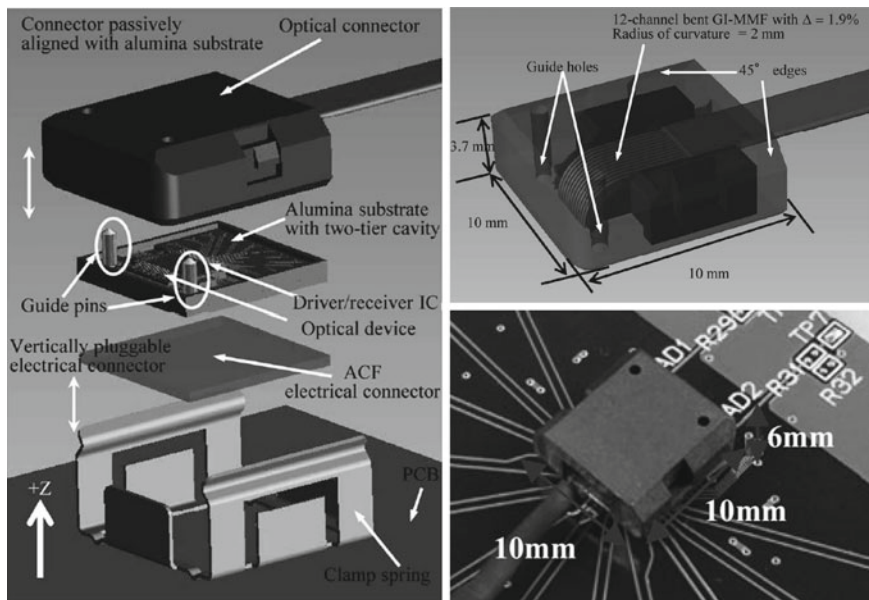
Left: Exploded view of the components comprising AIST’s low profile 12 channel parallel module [56] (© 2009 IEEE), upper right: transparent view of the optical connector showing the tight bend radius fiber [56] (© 2009 IEEE), lower right: image of the assembled module on a test card [85] (© 2008 IEEE)
